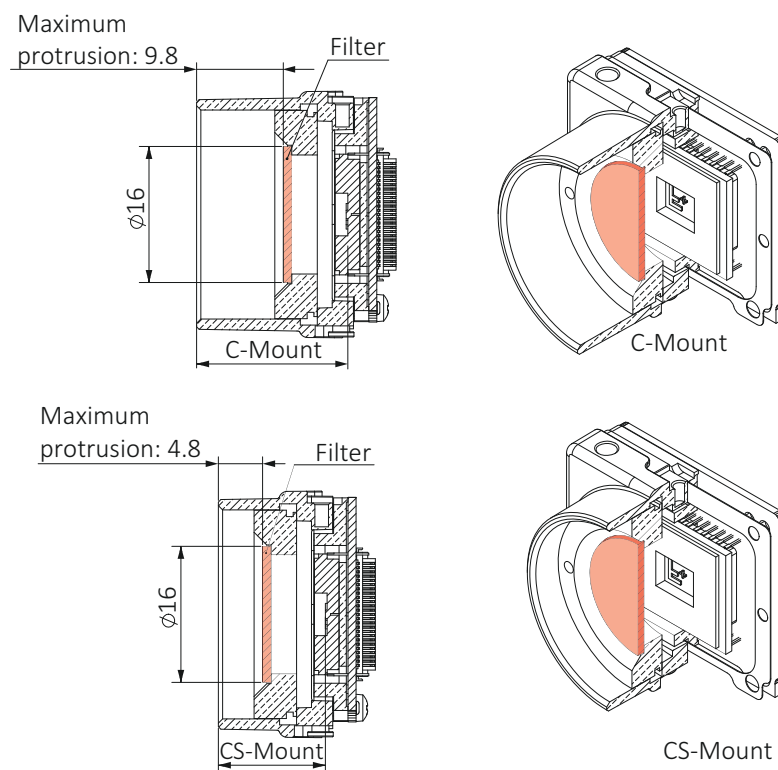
C-Mount and CS-Mount dimensions for Mako G models with a 16 mm filter
